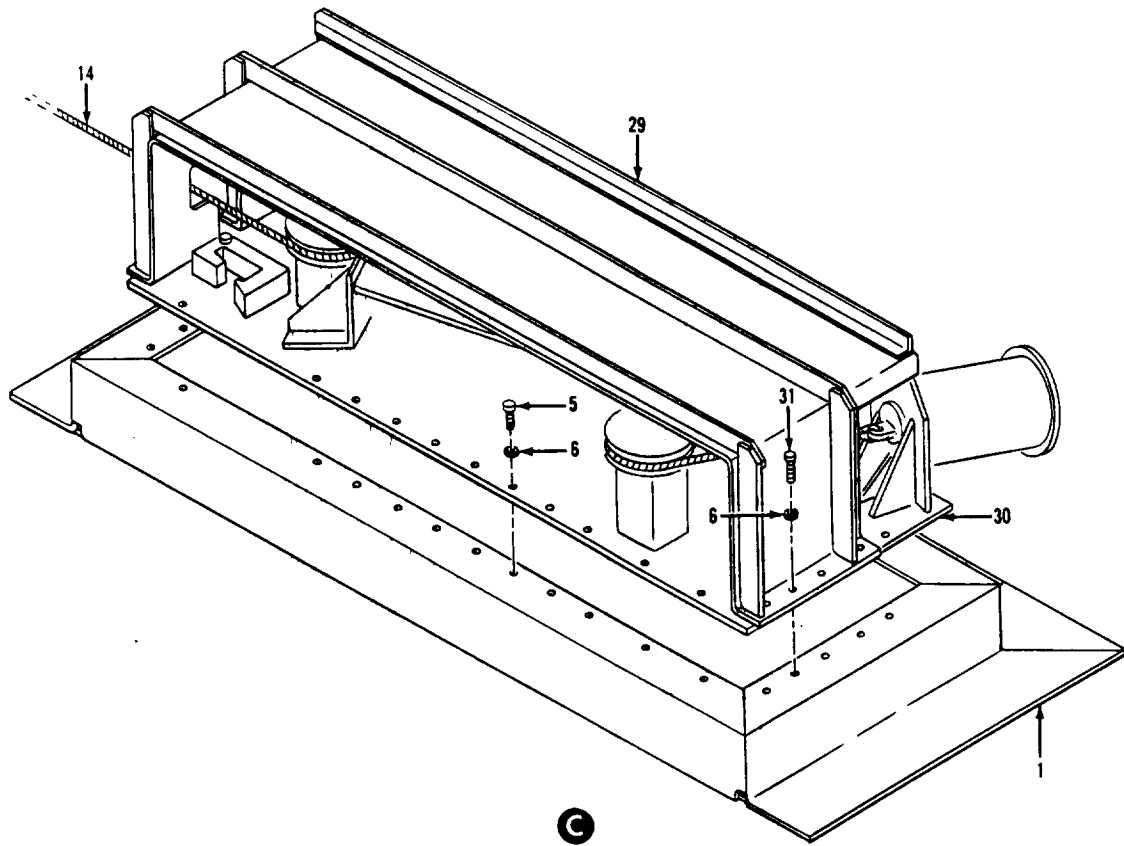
Extension Platform Assembly (Sheet 3 of 13)
